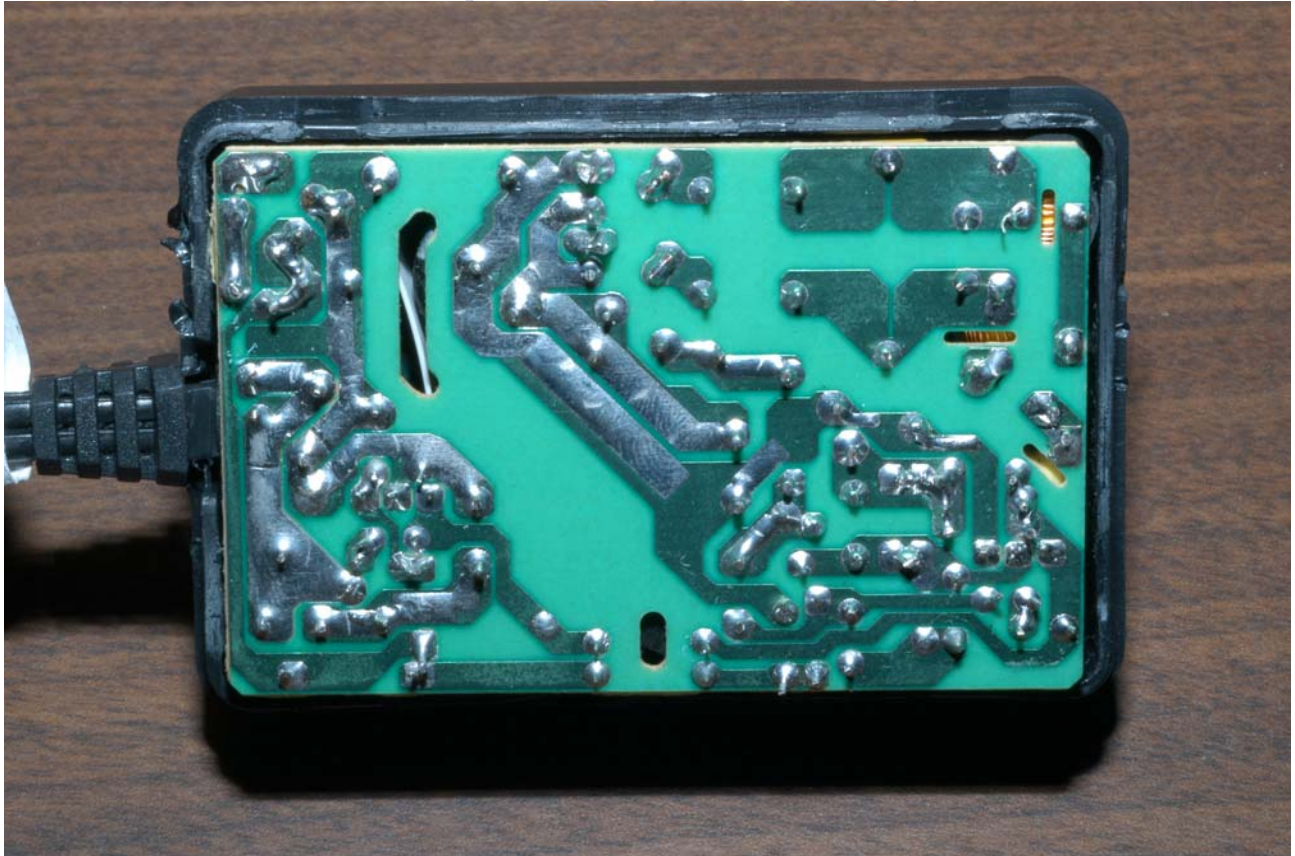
PLI Photograph Number 5405C2734LGLG-26 shows the EUT wall adapter with the enclosure removed from the printed circuit board. This view emphasizes the components on the Neutral side of the Printed Circuit Assembly. The Line and Neutral connections routed individually from the Printed Circuit Assembly to the contacts on the chassis.
